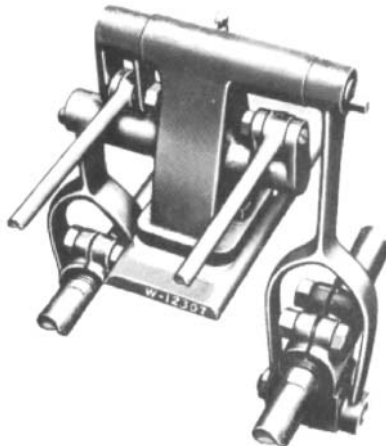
Steam valve actuating mechanism or a duplex pump (Flowsolve Corporation)
